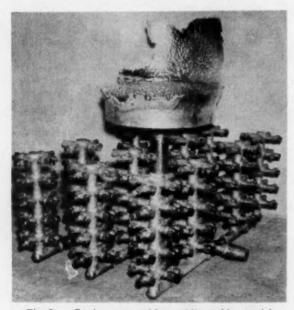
Casting setup with graphite mold material removed to show bottom feed, vertical gating technique.
